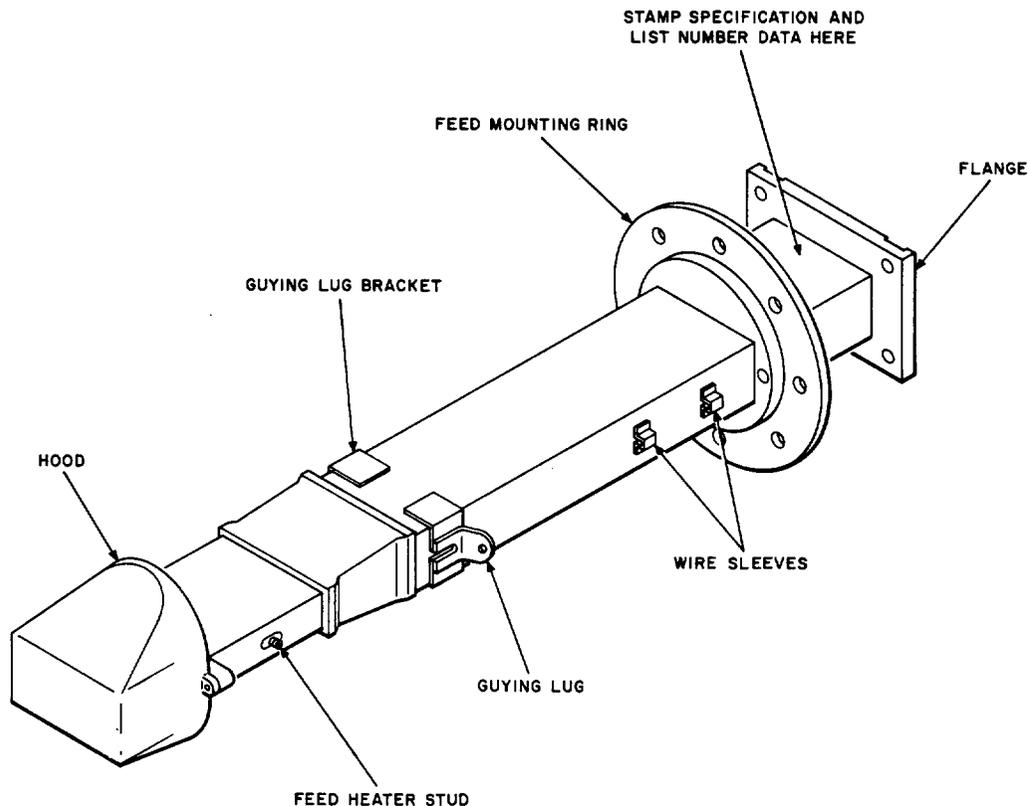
Broadband Antenna Feed Assembly (Gabriel Electronics)
